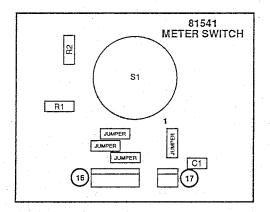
81541 METER SWITCH BOARD COMPONENT LAYOUT
